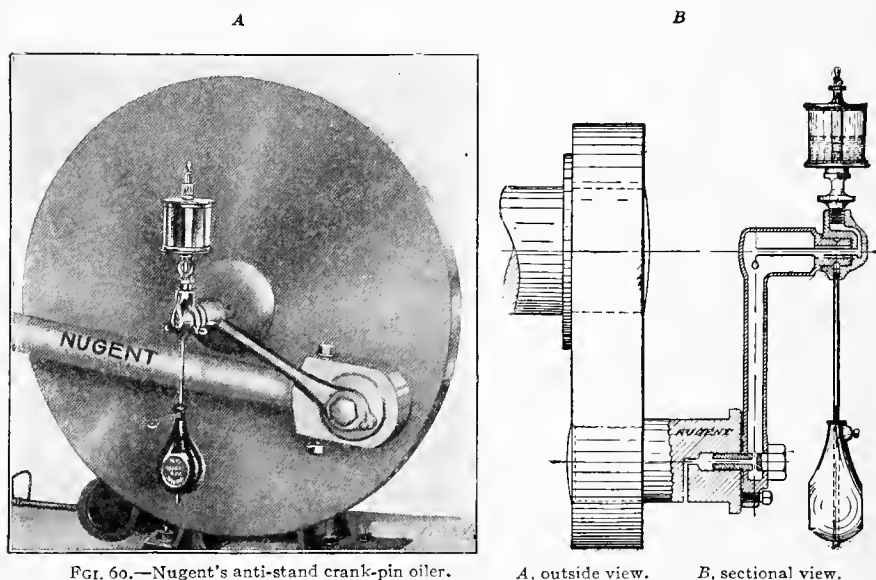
Nugent's anti-stand crank-pin oiler.
